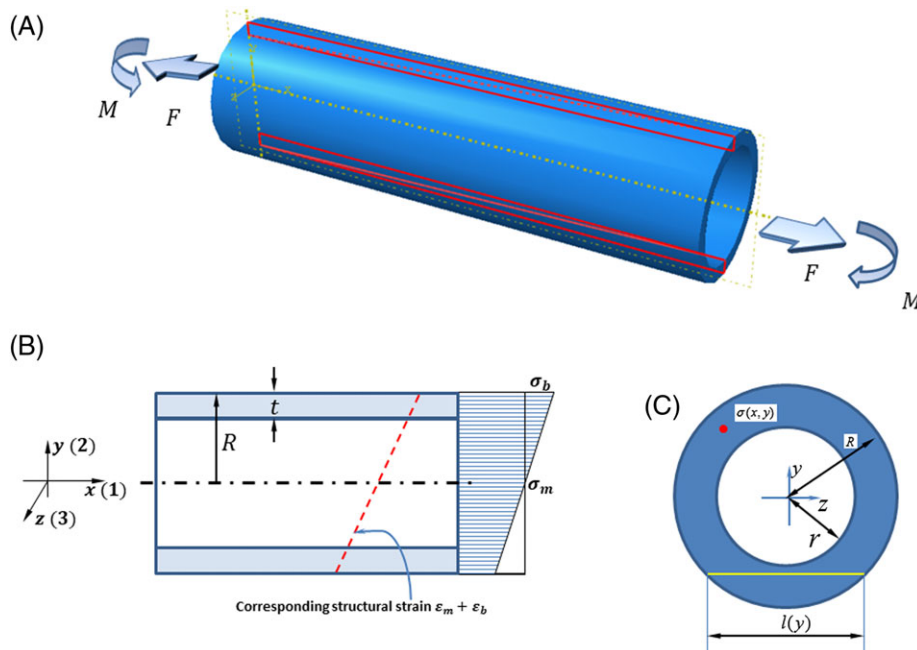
Traction structural stress determination for a pipe section in welded pipe component: A, pipe under remote loading, B, longitudinal cross section of pipe section, and C, transverse cross section [Colour figure can be viewed at wileyonlinelibrary.com]
